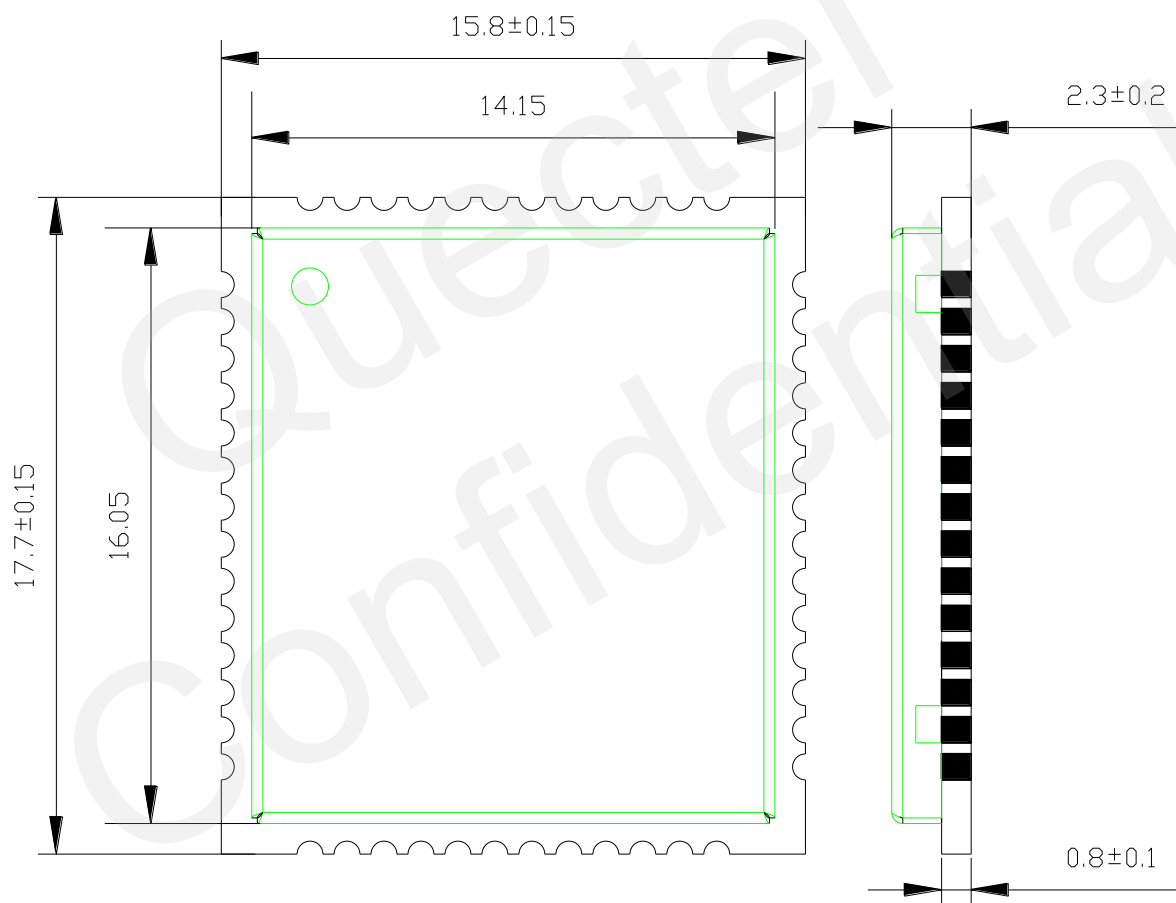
Top and Side Dimensions of M66-DS-OpenCPU (Unit: mm)
